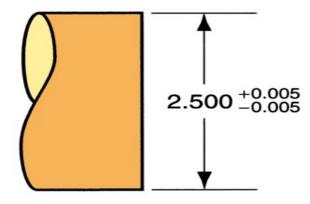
Ways to specify tolerance limits for a nominal dimension of 2.500
